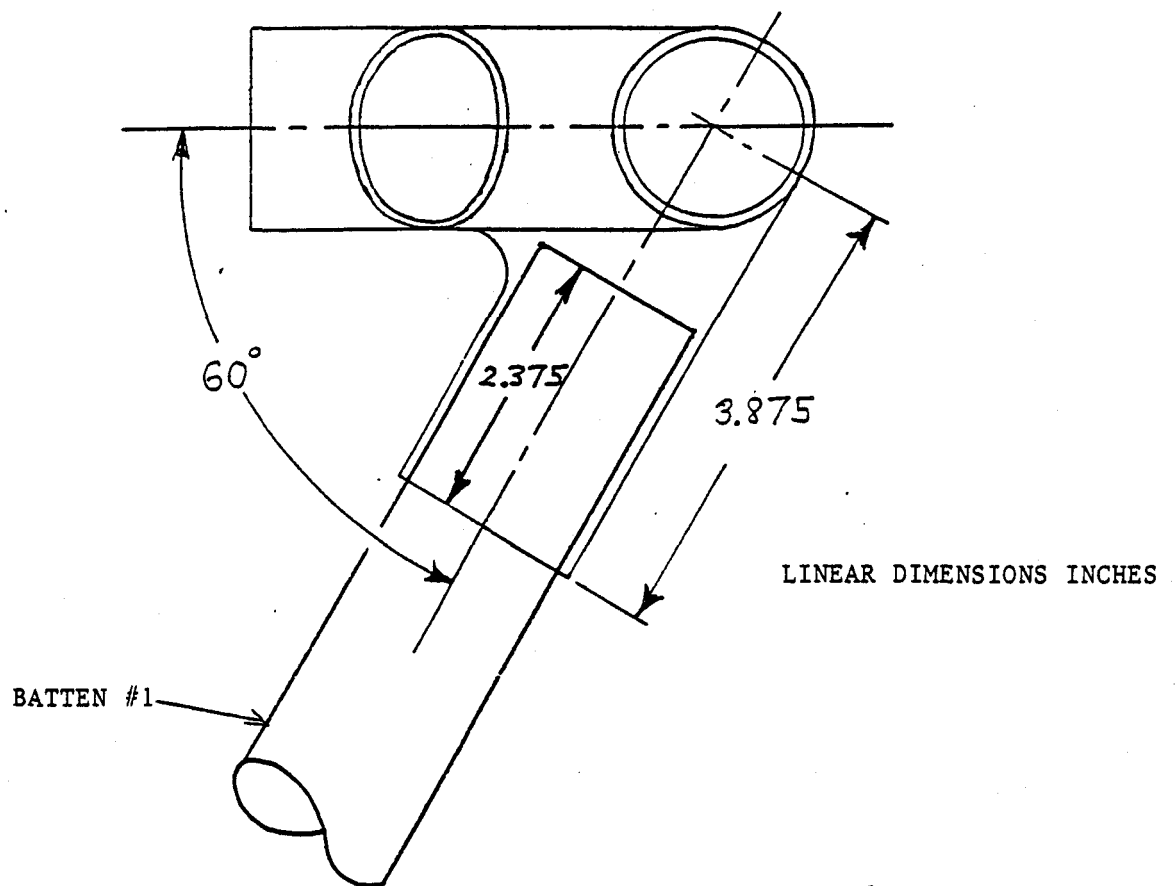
Tube Protrusion into End Fitting, Showing Batten #1
